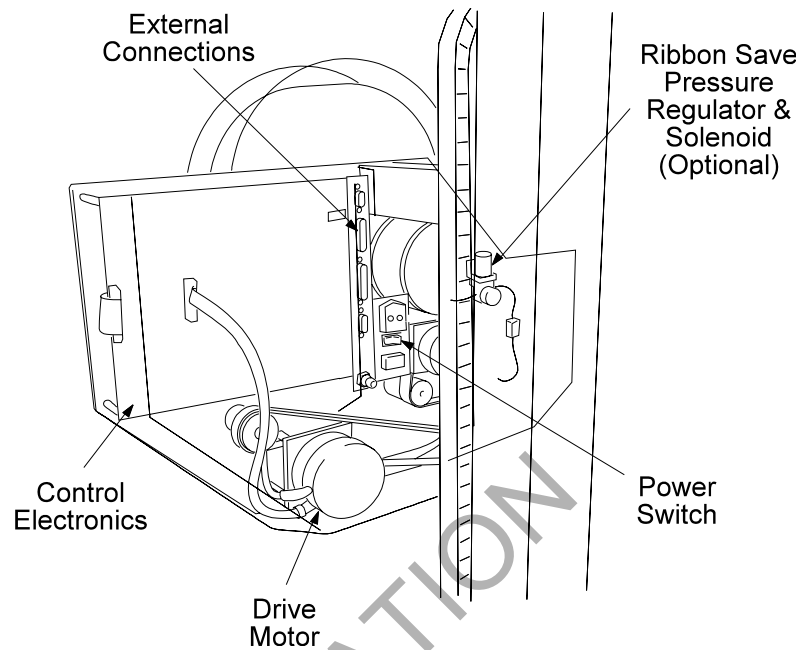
Cimjet 300 Rear View with Cover Removed
